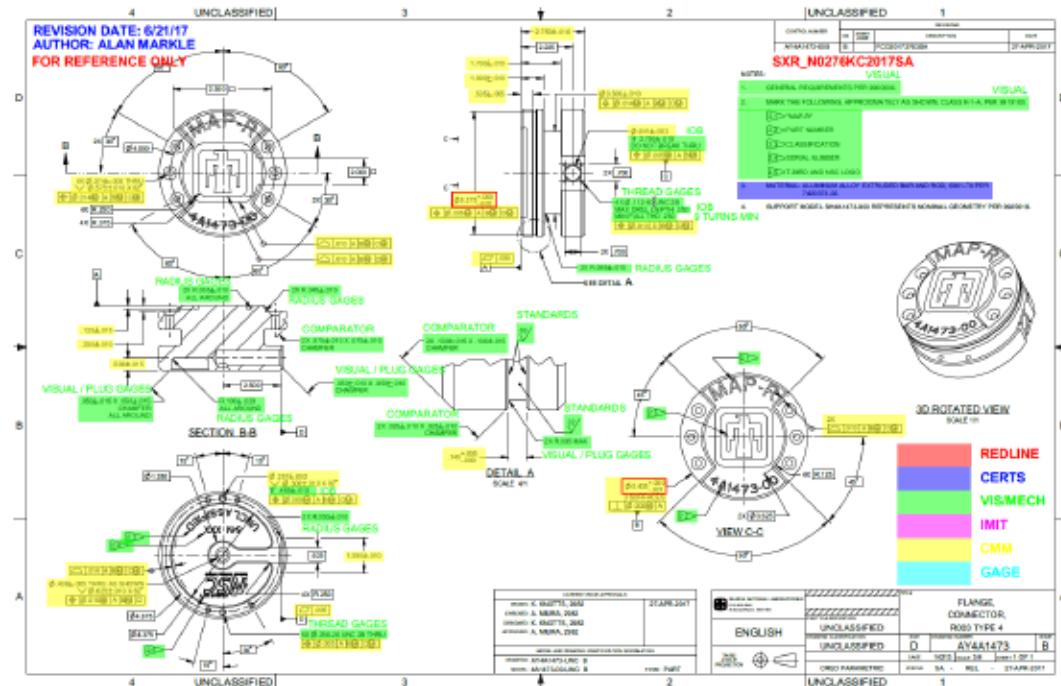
Drawing-Based Inspection Plan Methods - Tool Highlighting.
